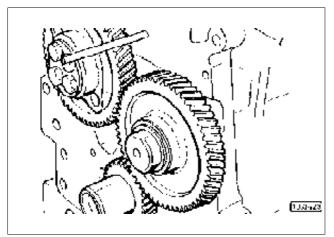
After the timing gear has been secured to shaft, fit the idler gear taking care the chiselings on teeth be in the same line. If one of these three gears must be replaced, valve timing procedure shall be repeated;
